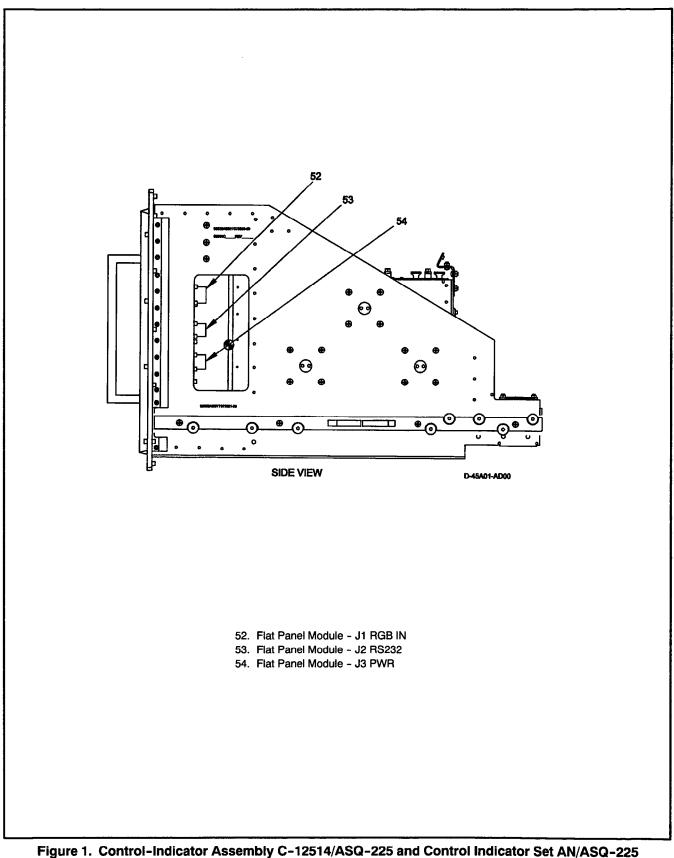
Control-Indicator Assembly C-12514/ASQ-225 and Control Indicator Set AN/ASQ-225 Components (Sheet 7)
